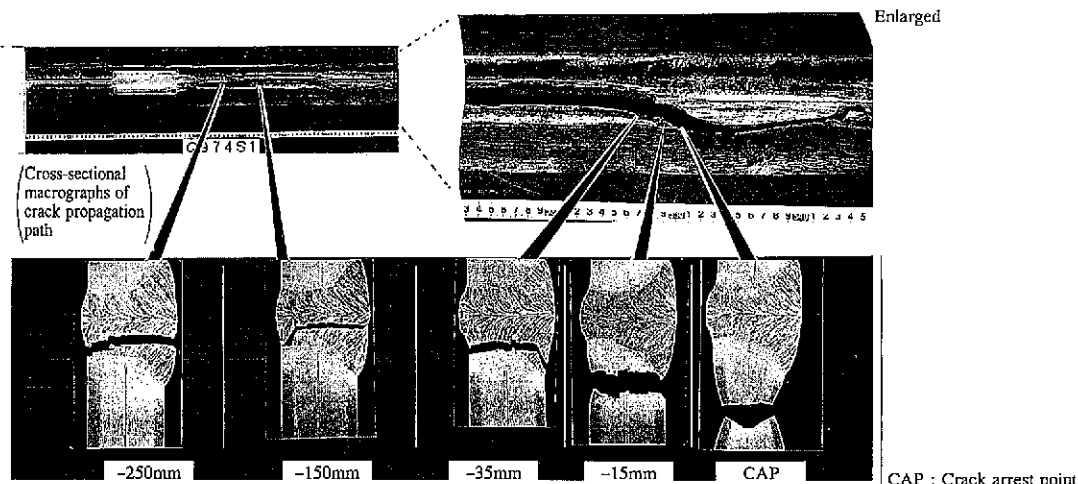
Macrographs of cross sections through crack propagation region of welded-joint brittle crack propagation test specimen
